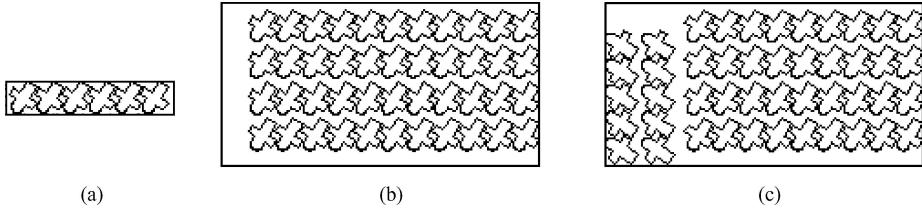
Blank layout and strip layout. (a) A blank layout, (b) A strip layout of 1-section, (c) A strip layout of 2-section.
